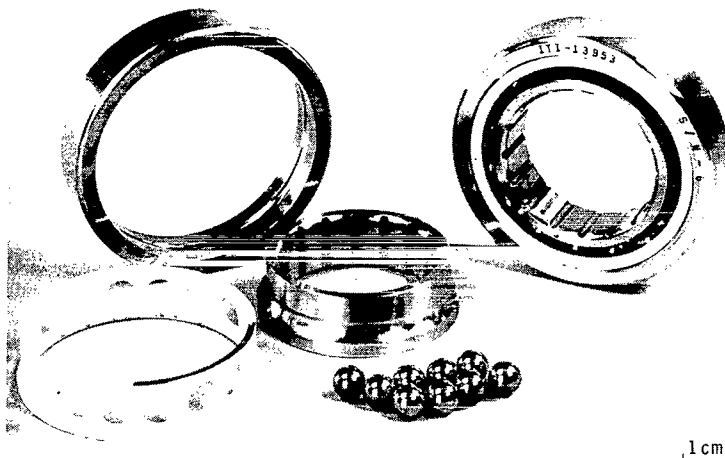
35-Millimeter-bore, angular-contact, high-speed ball bearing.
